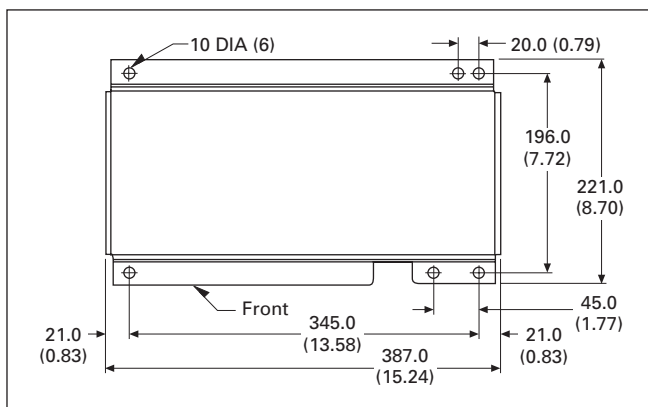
Base Plate Dimensions 160 – 400 Amperes
